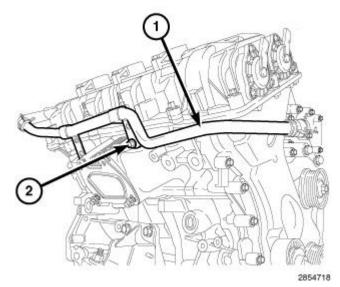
Heater Core Supply Tube Support Bracket & Retaining Bolt Courtesy of CHRYSLER GROUP, LLC
